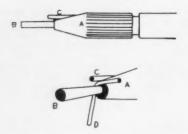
Diagram illustrating the spring winder: A—the scaler handle; B—the bur inserted into the scaler handle. The diameter of this bur has been reduced to .05"; C—arm soldered on to the scaler handle to hold wire when forming a spring; D—illustrates a wire in the process of being bent in the form of a spring.
